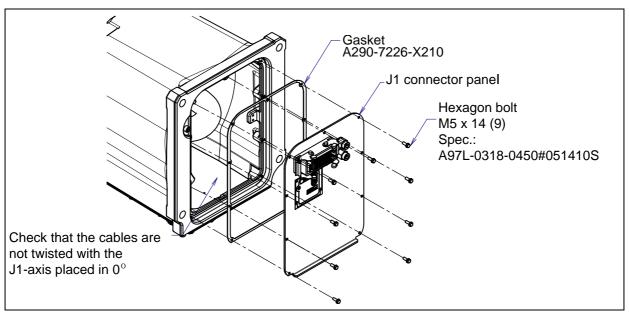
(b) Check the cables (J1-axis) (bottom side connector panel)
